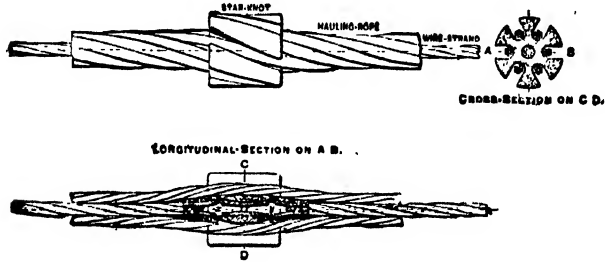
, 24, and 25.—Friction Grip or Coupling. (Ceretti and Tanfani's System.) Side Elevation, Cross Section, and Detail Views.
